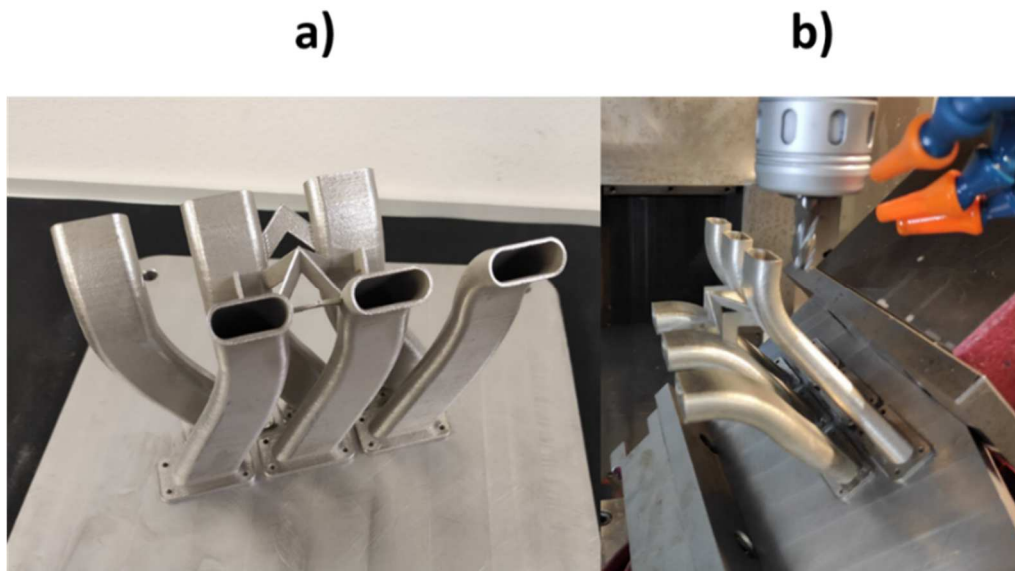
LPBF workpiece. a) as printed, b) set-up for milling
